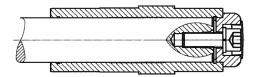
Gear unit mounted to shaft without a shoulder using the fastening element
